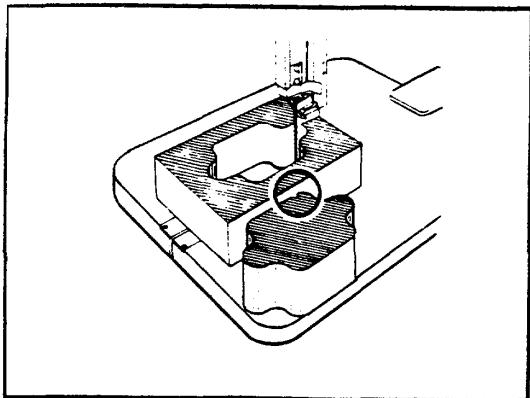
STARTING HOLE FOR SHARP CONTOUR CUTTING.
